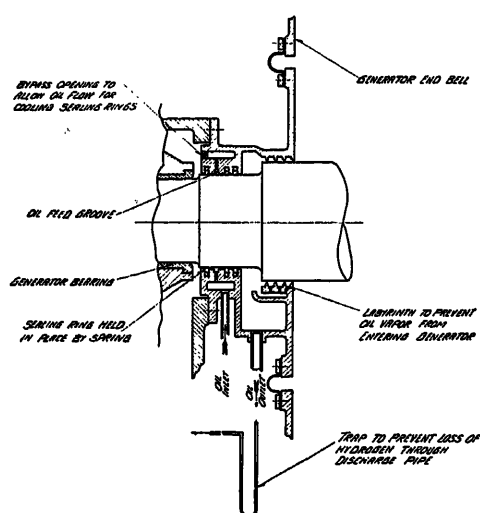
CROSS-SECTION OF SEALING GLAND FOR TURBINE GENERATORS
